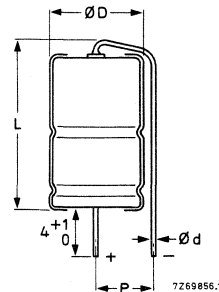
Style 3; see Table 1c for dimensions d, D, L and P.
